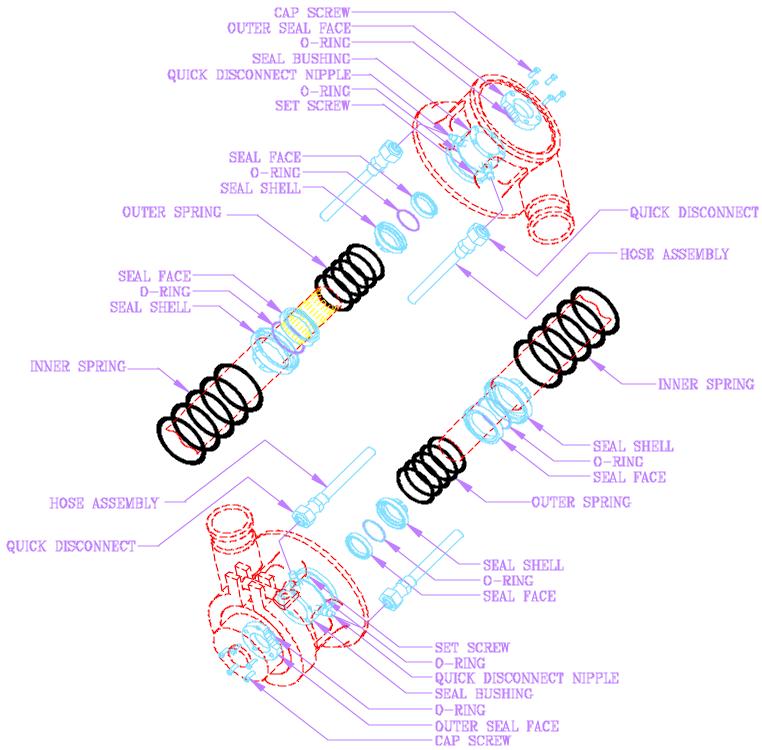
Parts Location Of Standard And Hard Face Flushed Seal Assemblies
